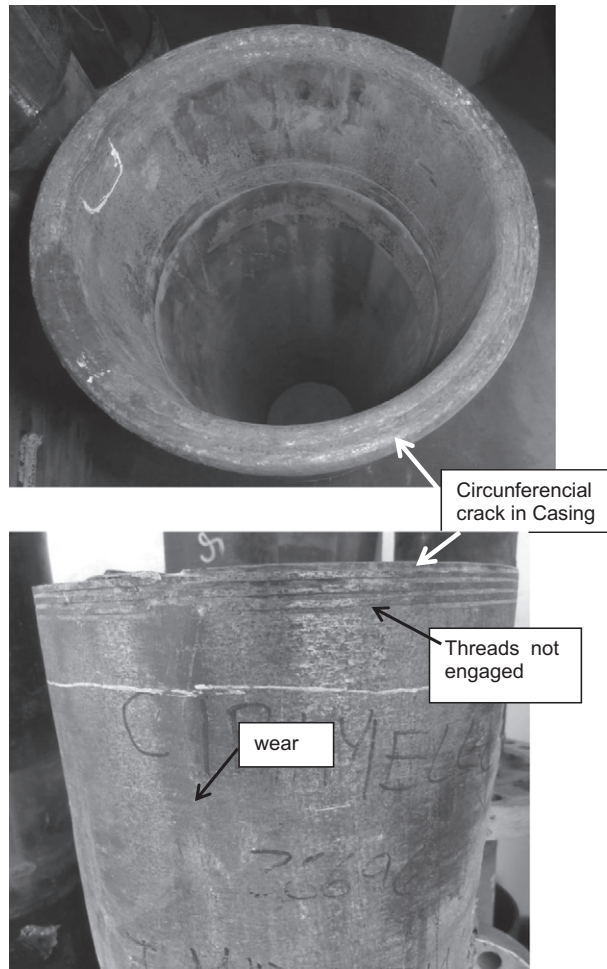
Severed Casing: (a) upper part, (b) lower part ("fished").
